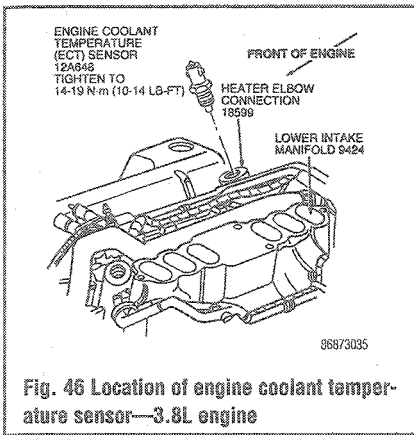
Location of engine coolant temperature sensor—3.8L engine
